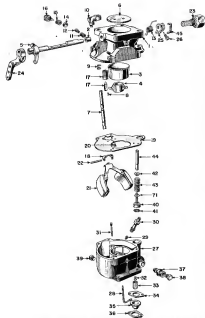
Exploded view of sub-assembly. See: (1) A throttle body; (2) A fueling (3) air control; (4) primary venturi; (5) throttle shaft and stop assembly; (6) handle; (7) mixture reducing valve assembly; (8) atmosphere jet; (9) spring; (10) mixture control; (11) spring; (12) screw; (13) spring; (14) spring; (15) spring; (16) spring; (17) throttle valve and seat; (18) fuel valve; (19) fuel valve; (20) fuel valve; (21) fuel valve; (22) fuel valve; (23) fuel valve; (24) fuel valve; (25) fuel valve; (26) fuel valve; (27) fuel valve; (28) fuel valve; (29) fuel valve; (30) fuel valve; (31) fuel valve; (32) fuel valve; (33) fuel valve; (34) fuel valve; (35) fuel valve; (36) fuel valve; (37) fuel valve; (38) fuel valve; (39) fuel valve; (40) fuel valve; (41) fuel valve; (42) fuel valve; (43) fuel valve; (44) fuel valve.
